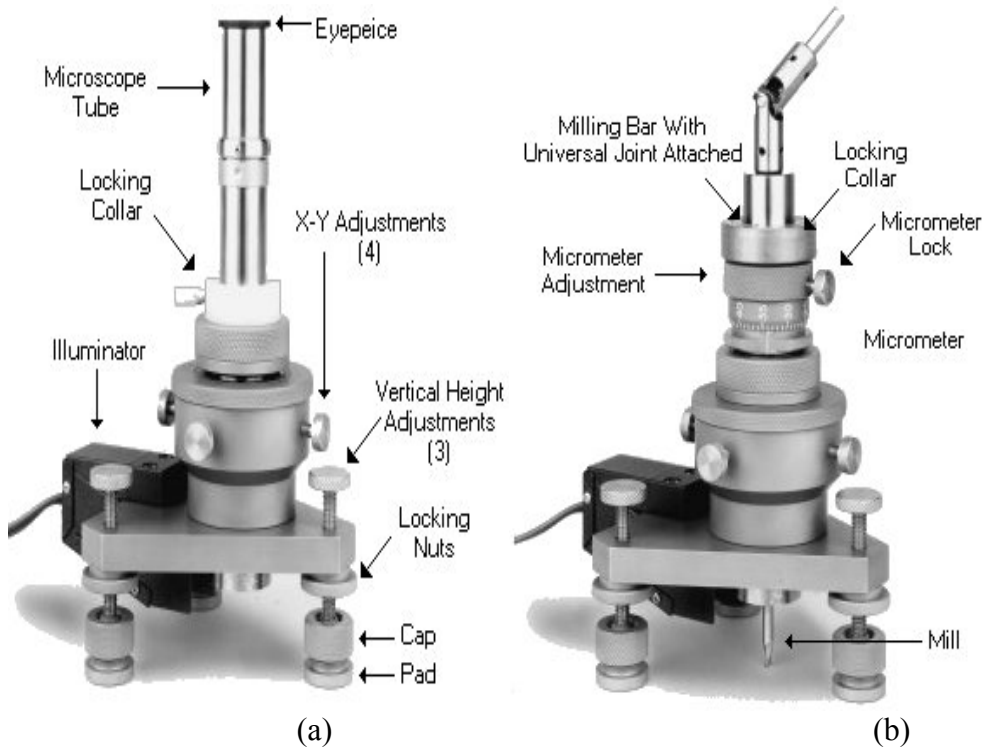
RS-200 Milling Guide (a) with microscope (b) with milling bar
